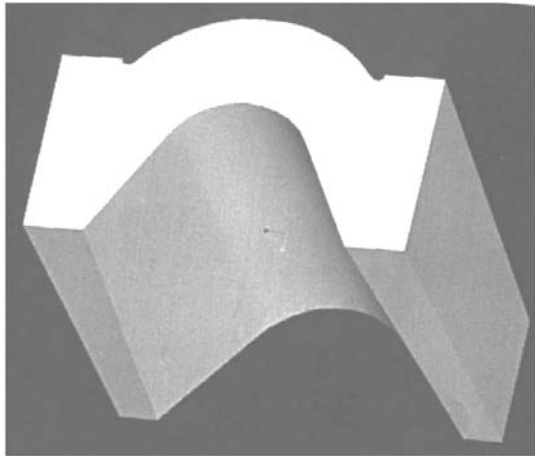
Ceramic core for stainless steel integral turbine rotor.
